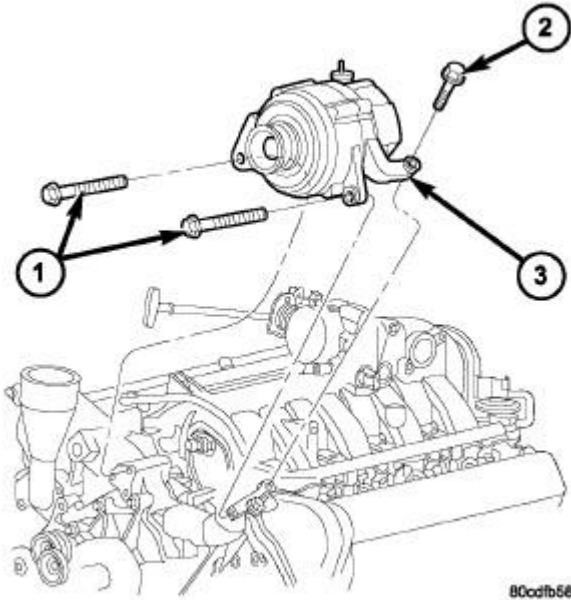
Remove/Install Generator - 3.7L/4.7L
